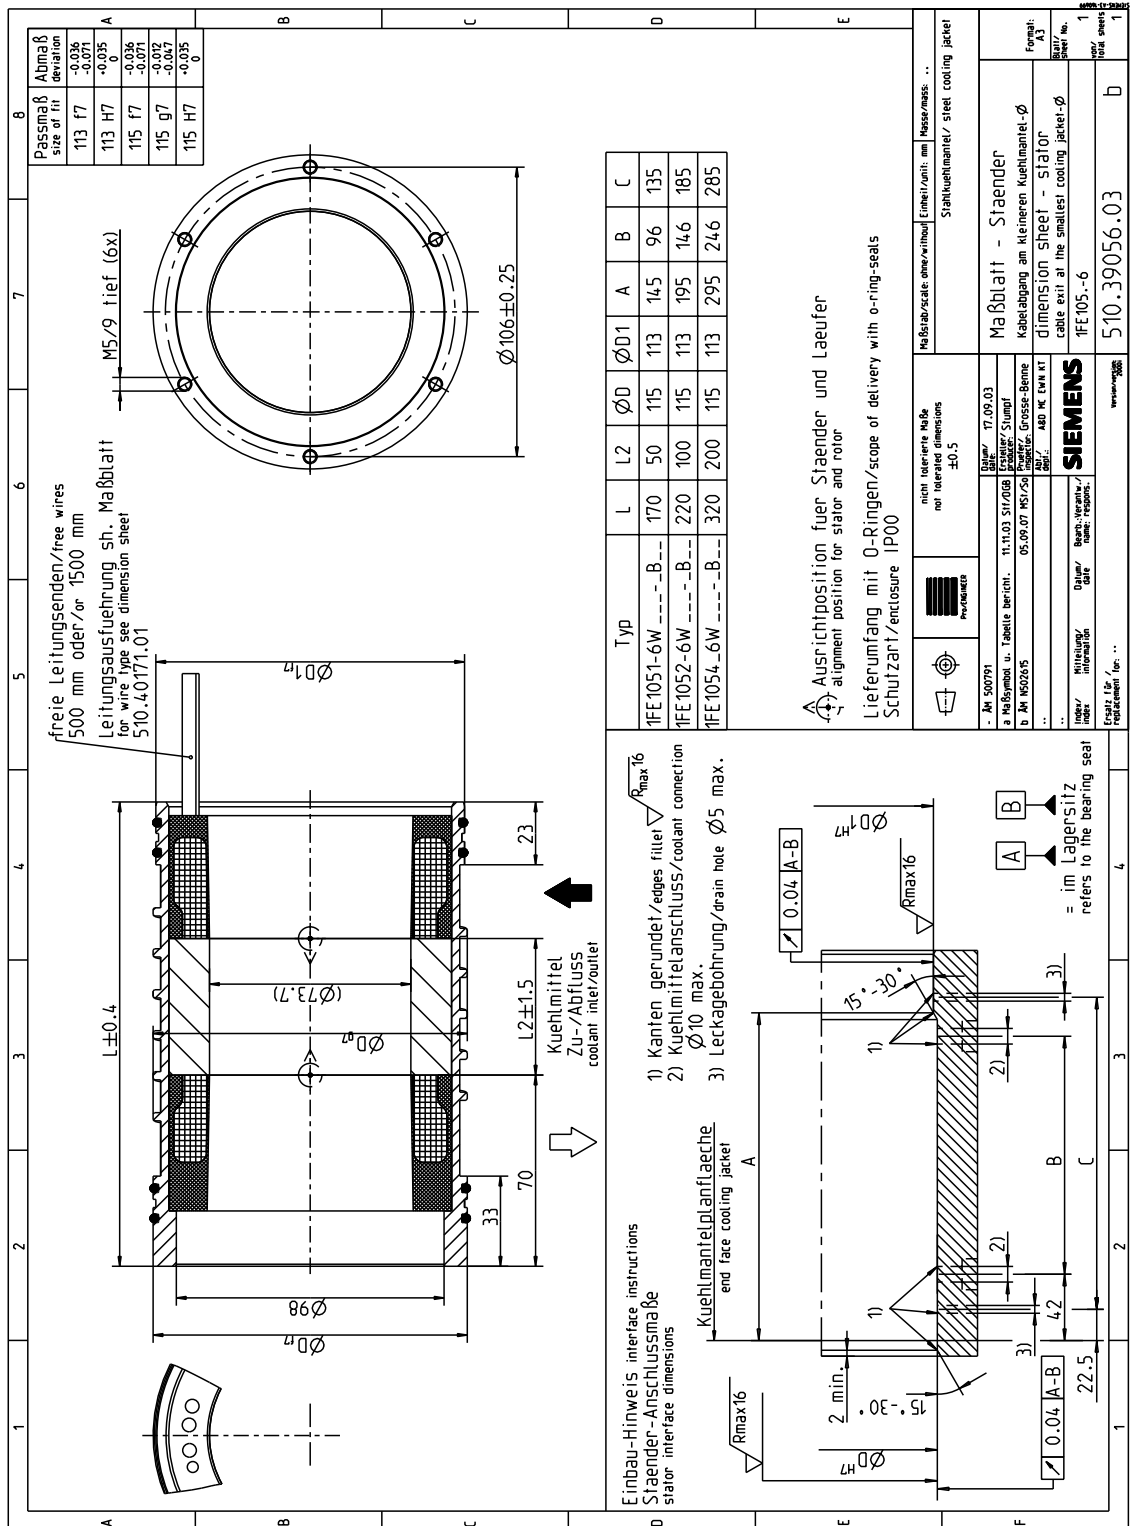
1FE105□-5, stator with cooling jacket, cable outlet at the smaller cooling jacket diameter
